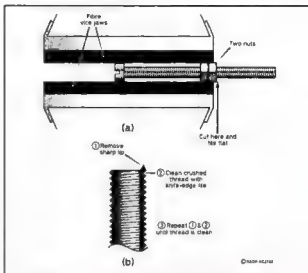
(a) Gripping Screw for Shortening. (b) Restoring Cut Thread with Needle File.
